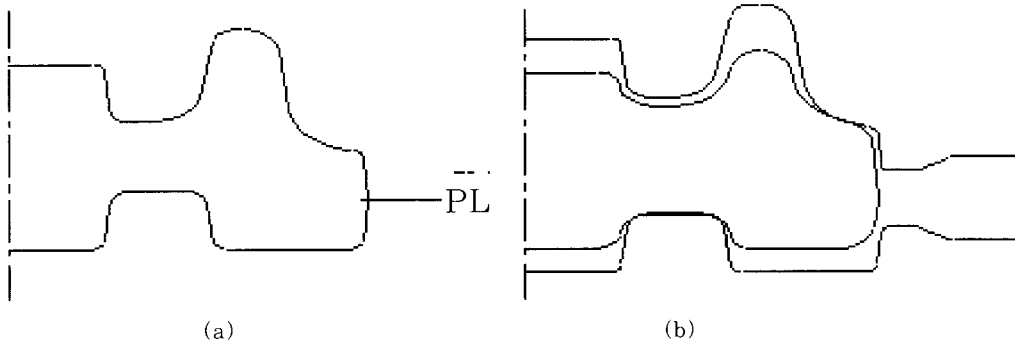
Example of a finisher : (a) finisher, (b) blocker in the finisher dies
